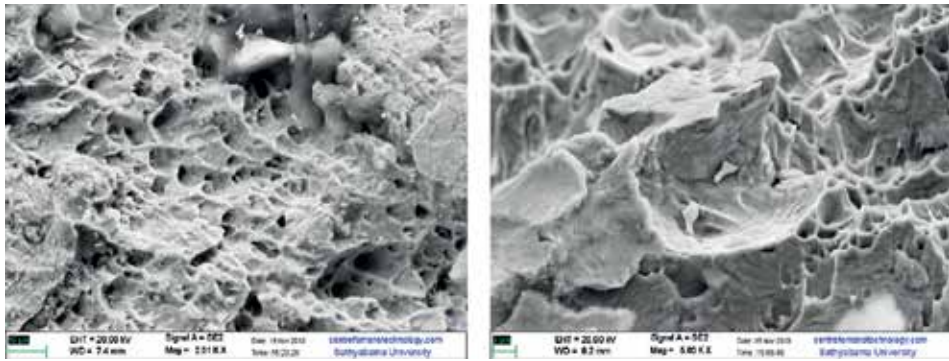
SEM image in impact fractured sample on 304L-Cu joint.
